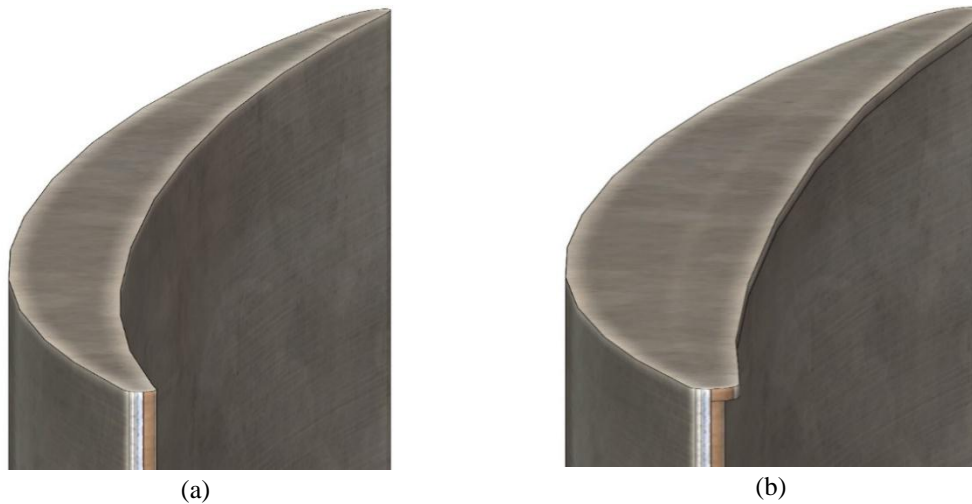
CAD model of the blade; (a) Baseline blade, (b) Pressure-side winglet
